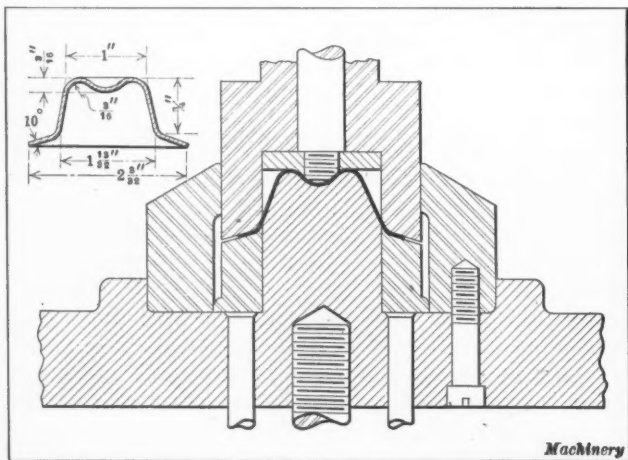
Shell of Special Shape and Die used in partially drawing it to Shape
